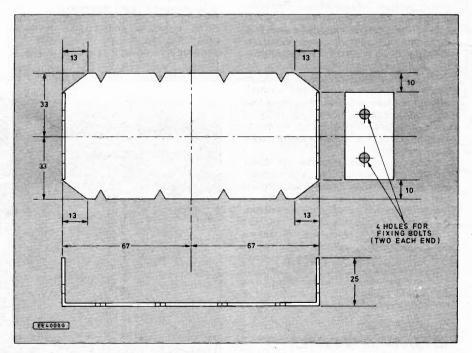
Approximate shape of metal chassis which should be cut and drilled to fit into the battery compartment. Dimensions are in millimetres.
